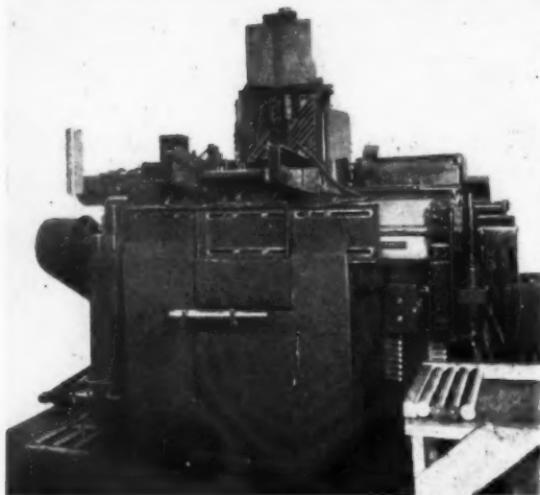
One of the first shear-cut machines built by General Electric for machining motor shafts in large lots. The front view shows the rough stock in upper magazines, and machined shaft in unloading magazine. Skiving or shear-cutting tools at rear of machine.
